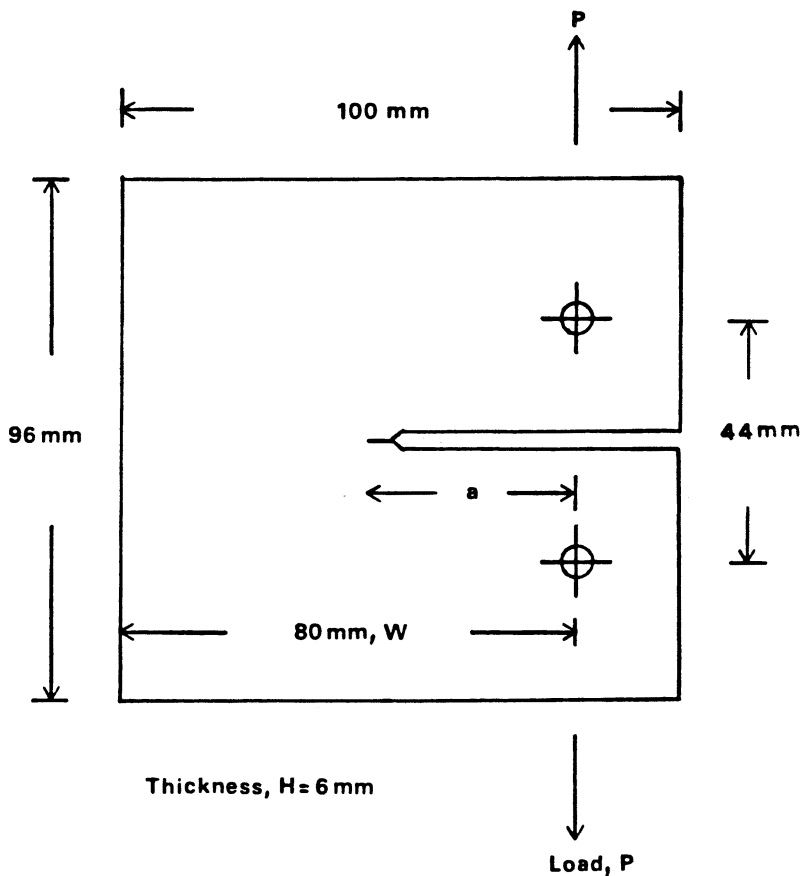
Dimensions of compact-tension specimen used for fracture experiments.
